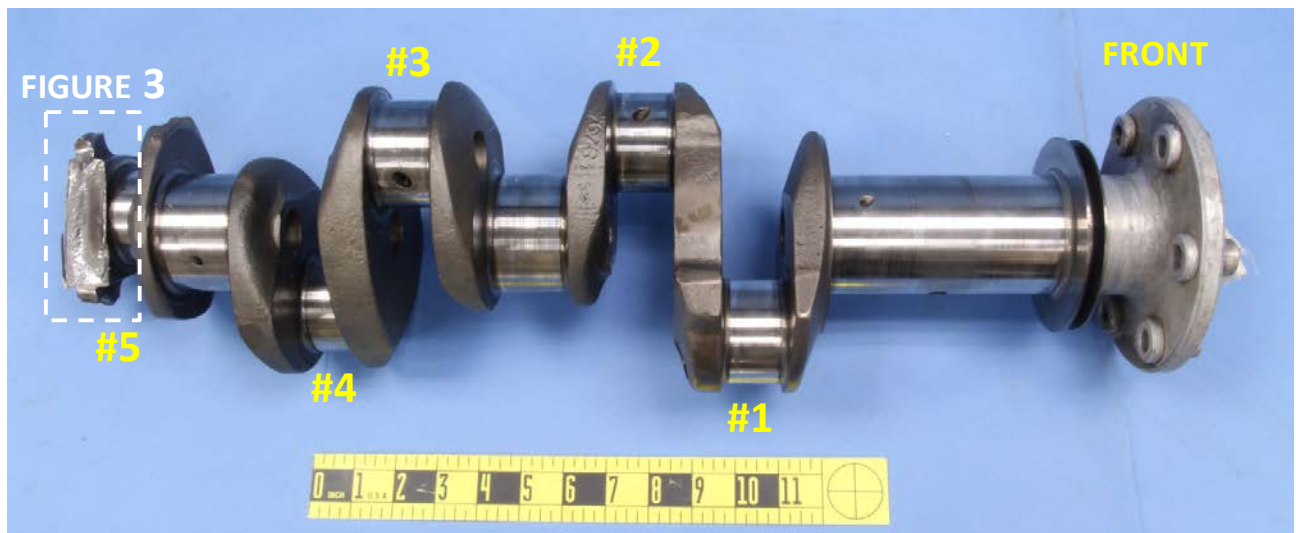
Overall photo of the separated crankshaft with the connecting rod journal numbered. The indicated fracture surface is shown in more detail in Figure 3.
